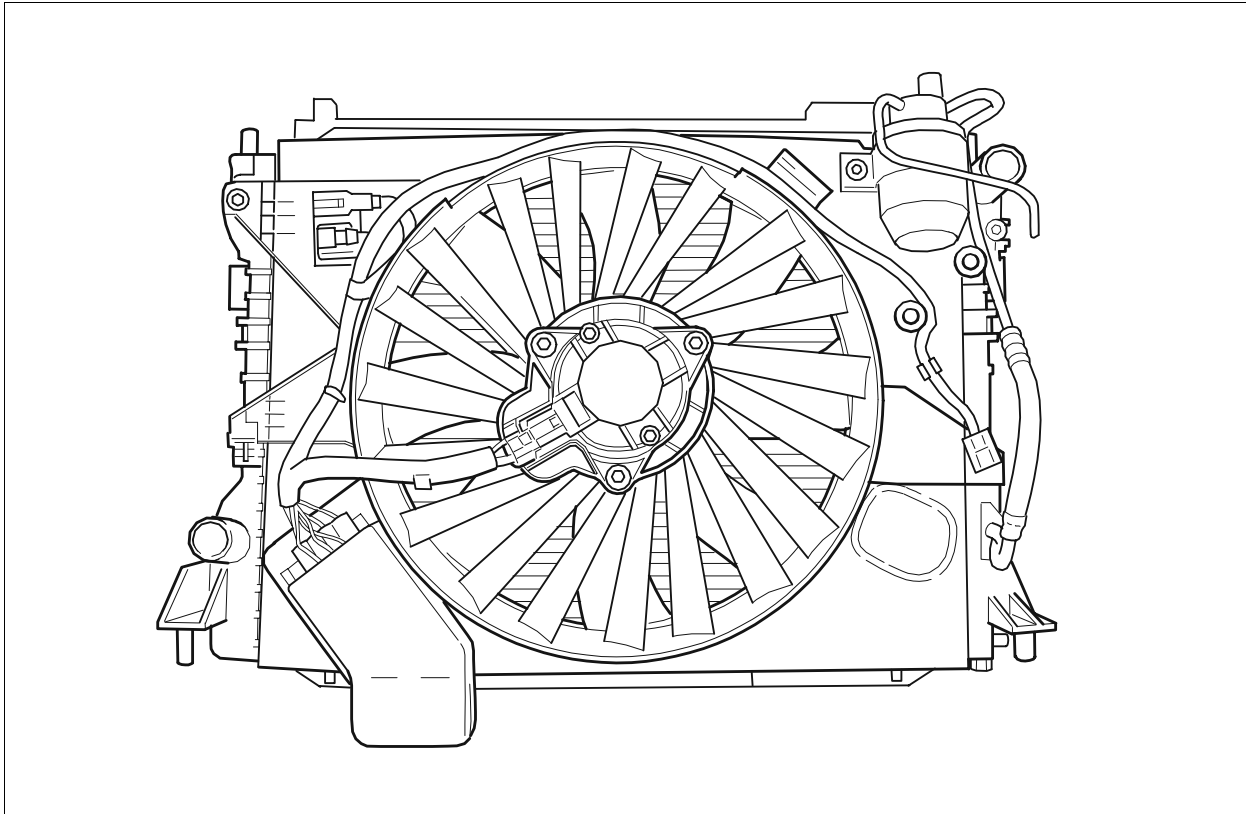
RADIATOR AND FAN SHROUD ASSEMBLY (X400)
